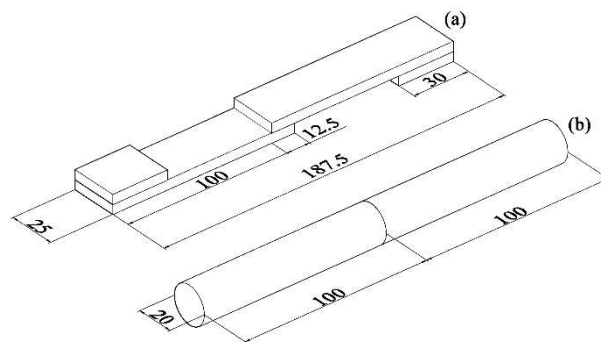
Geometry of the specimens used in single-lap (a) and butt (b) joints (dimensions in [mm]).
